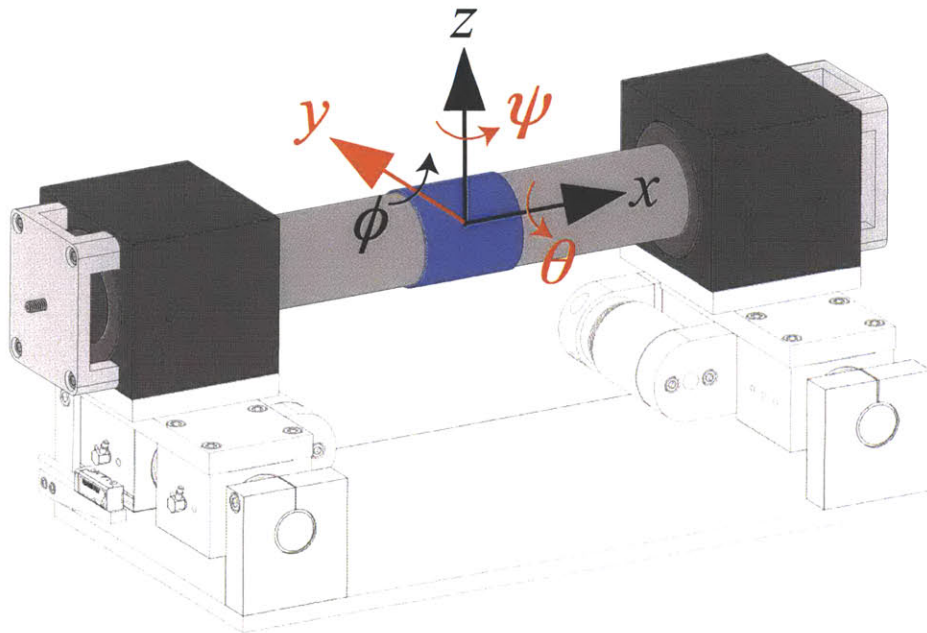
Print head construction: The 2" diameter 440C stainless steel print roll is supported radially by air bushings that allow it to rotate with nearly zero friction. The print roll is constrained from lateral movement in the x direction by opposing flat round puck air bearings, mounted on ball joints. The thrust bearing on the inboard side of the machine is fixed, while the thrust bearing on the outboard side of the machine is spring pre-loaded.
